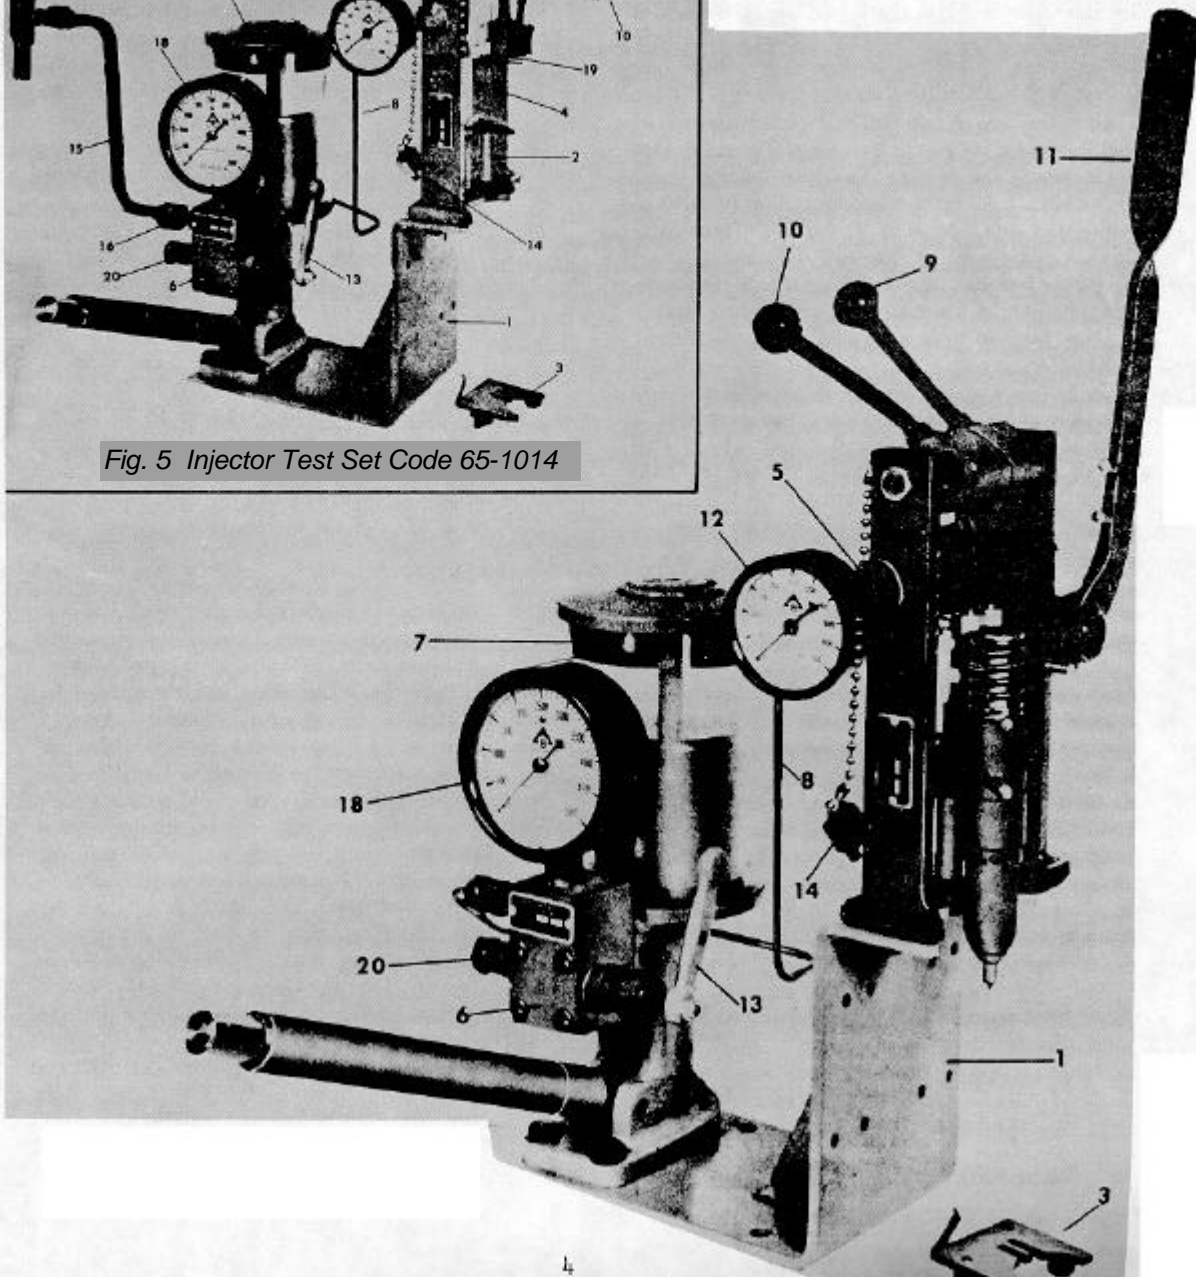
Model YFL Nozzle tester mounted on Test Fixture with Series 71 Offset Body Unit Injector installed
